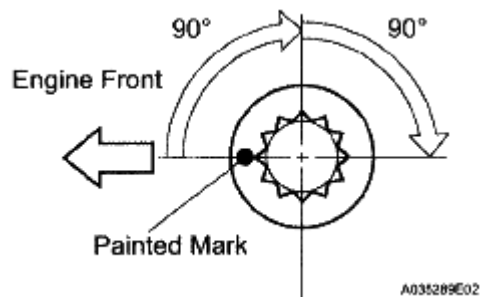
Identifying Cylinder Head Bolt Head Paint Mark
